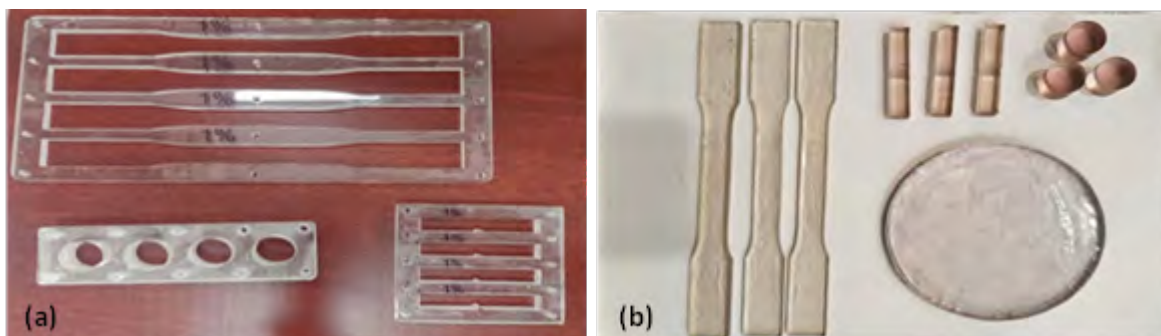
(a) The Casting Molds; (b) The Samples After Removal from the Molds
